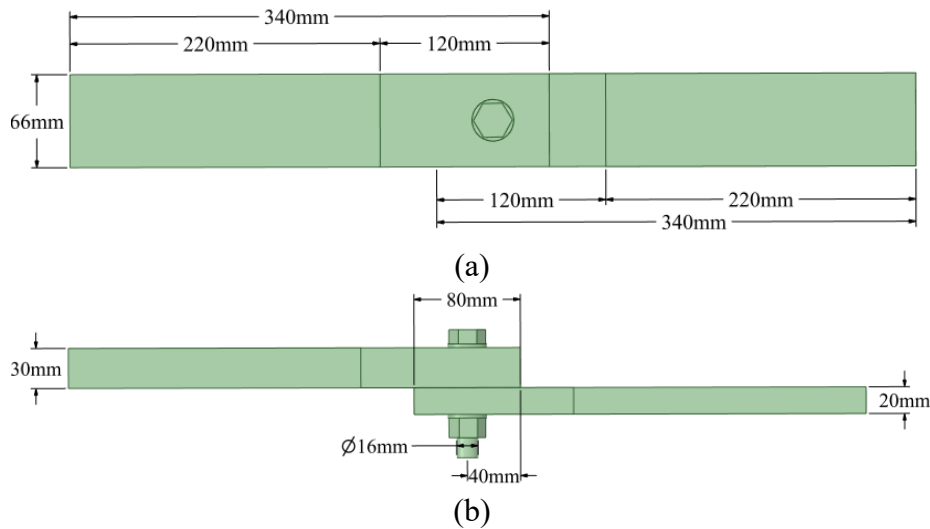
Single-lap joint geometric detail (a)top view (b) front view
